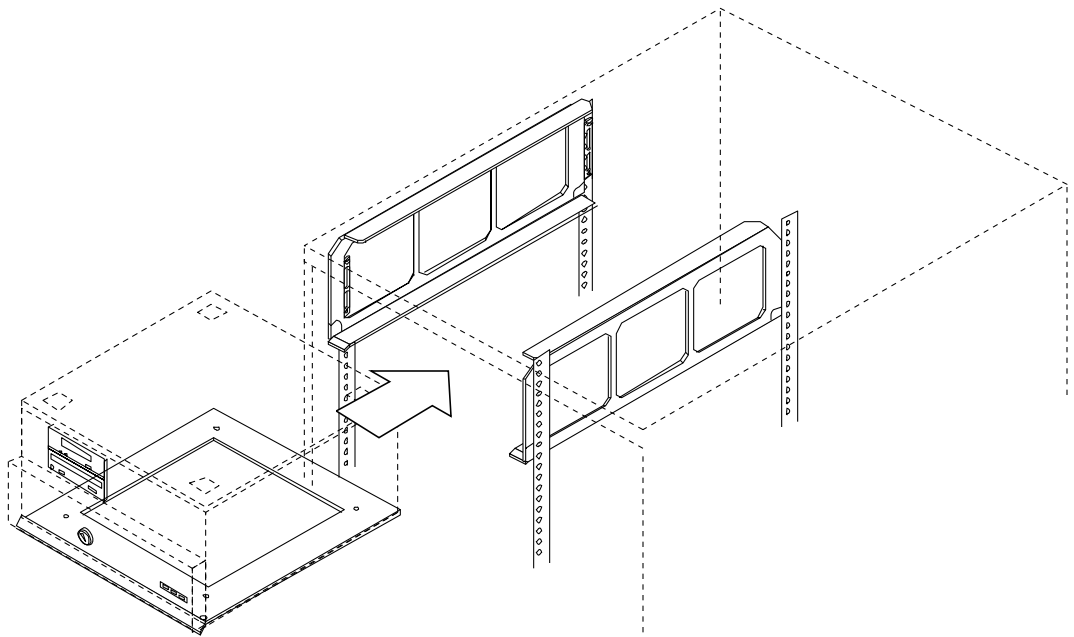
Aligning the Chassis Base Plate with the Side Rails
